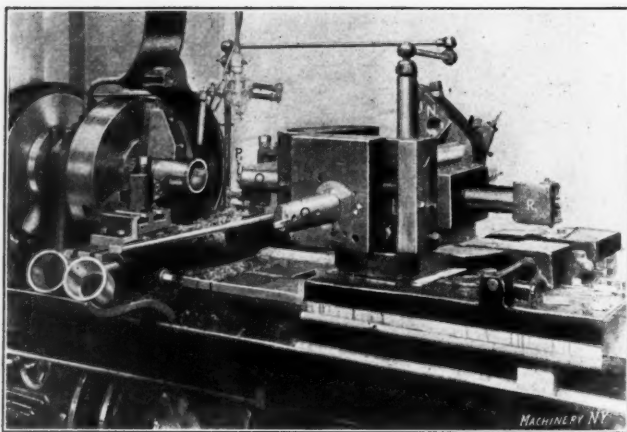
Boring and Facing the Bottom of the Bowl with Turret Tools manipulated by the Cross-slide
